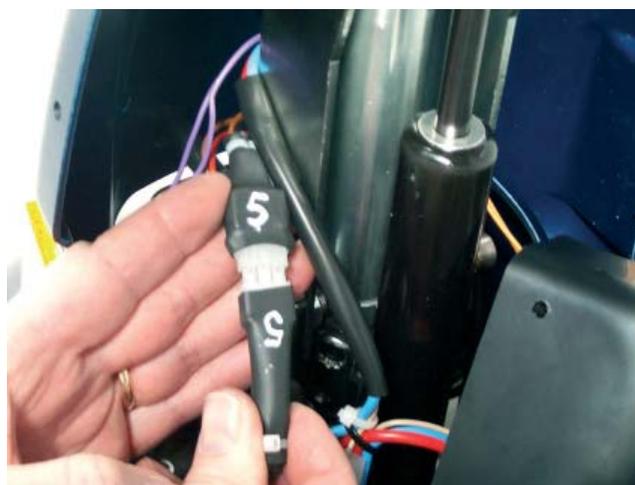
Connect the sensor to socket no. 5. Take care to secure the cable with cable binders so that it cannot be pinched by the front forks and/or handlebars.
